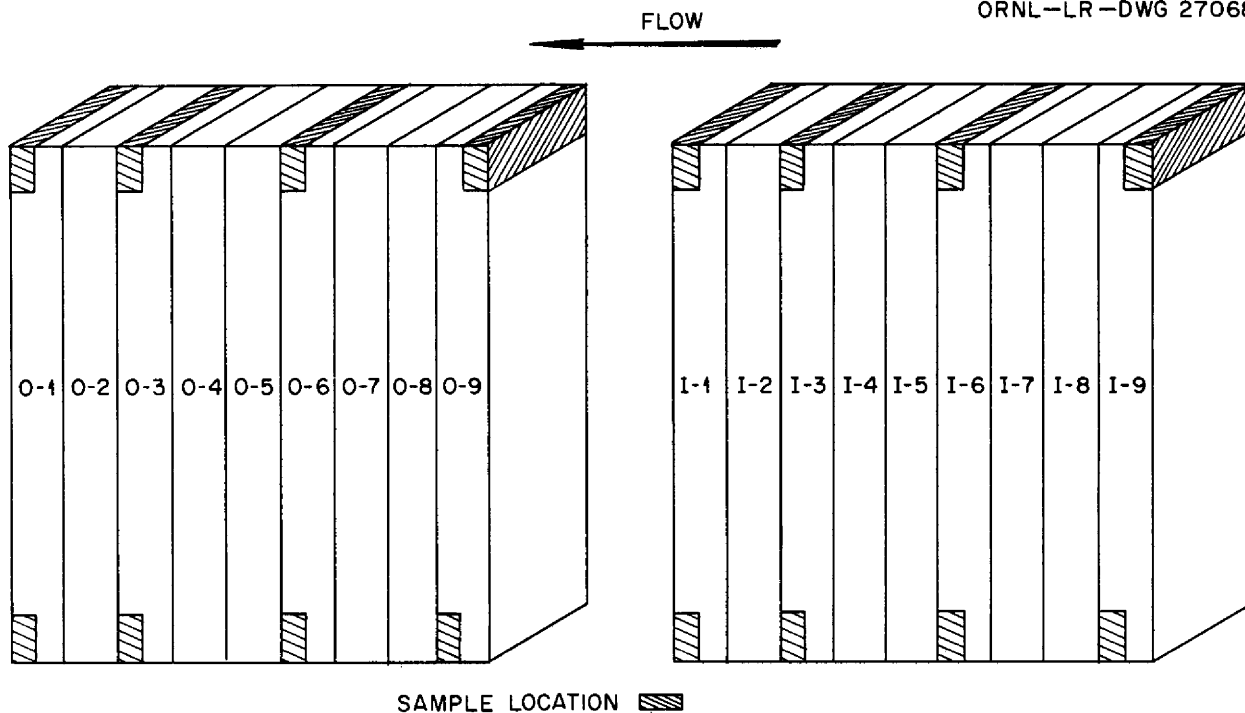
Diagram of Radiator Showing Locations at Which Samples Were Taken for Evaluation of Fin-to-Tube Joint Braze Integrity.
